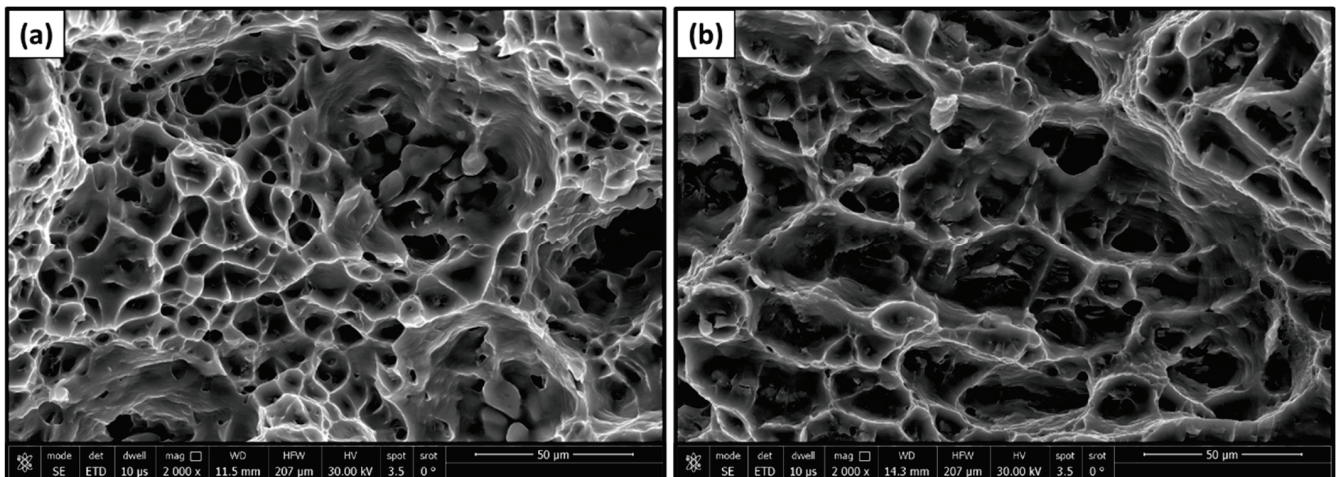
Fracture surface morphology of the dissimilar AA7075/AA5083 FSWed joints welded at travel speeds of (a) 25 mm/min and (b) 75 mm/min.
